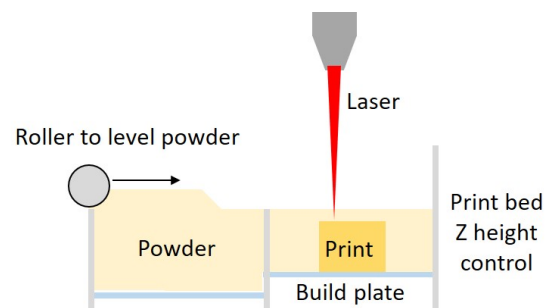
Schematic of a selective laser sintering (SLS) or selective laser melting (SLM) printer
